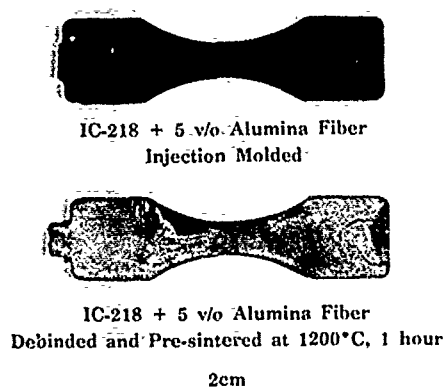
A photograph of two injection molded tensile bars formed from the IC-218 intermetallic powder with 5 vol.% of alumina fiber, molded with polyethylene wax as the binder. The upper bar is as-molded, while the lower bar is debinded and pre-sintered at 1200°C for 1 h.
